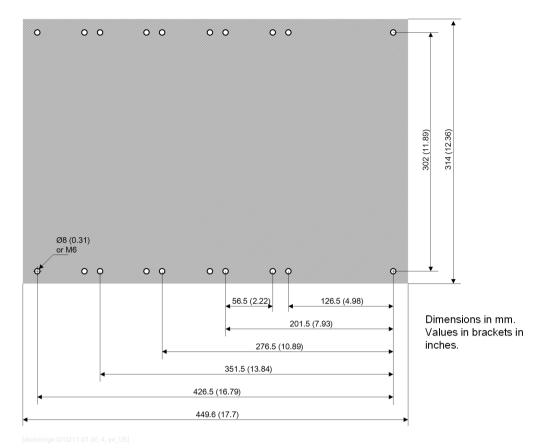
Drilling Pattern of a 1/1 Surface-Mounted Device – 1st Device Row
